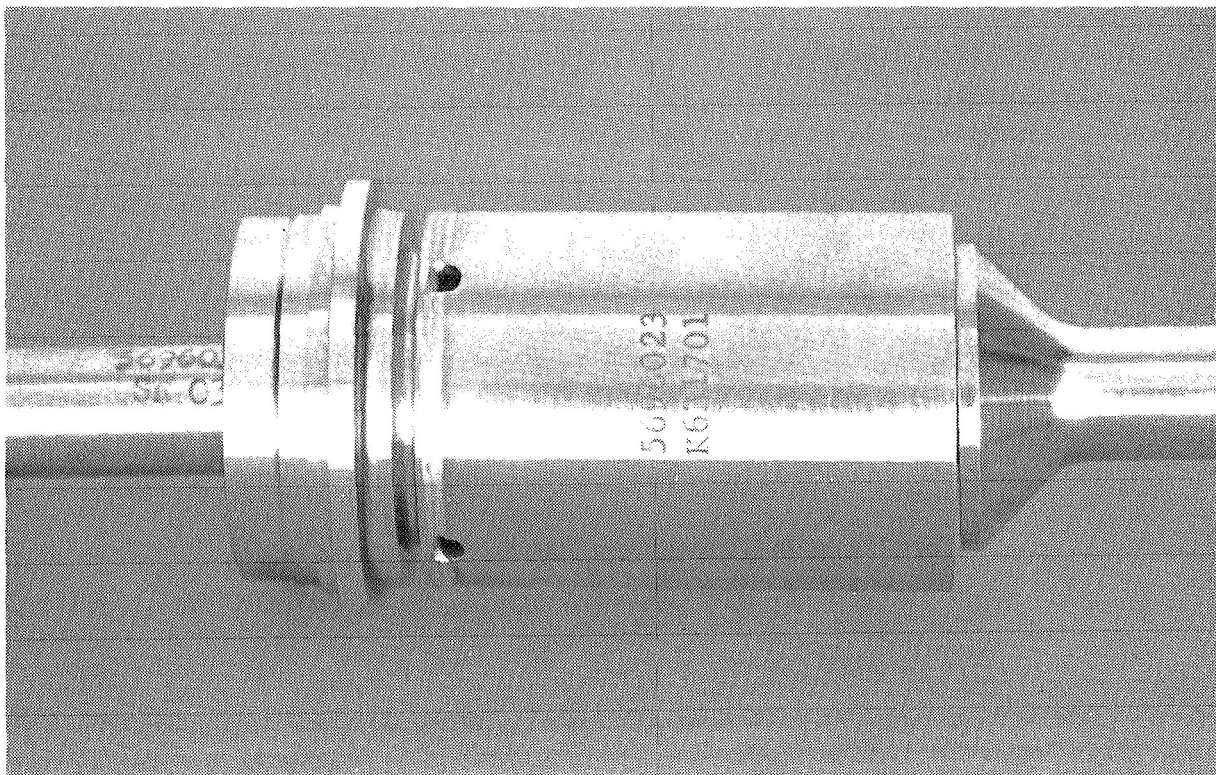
1 Valve Poppet-Shaft Bellows Seal Assembly After Task III Testing.
